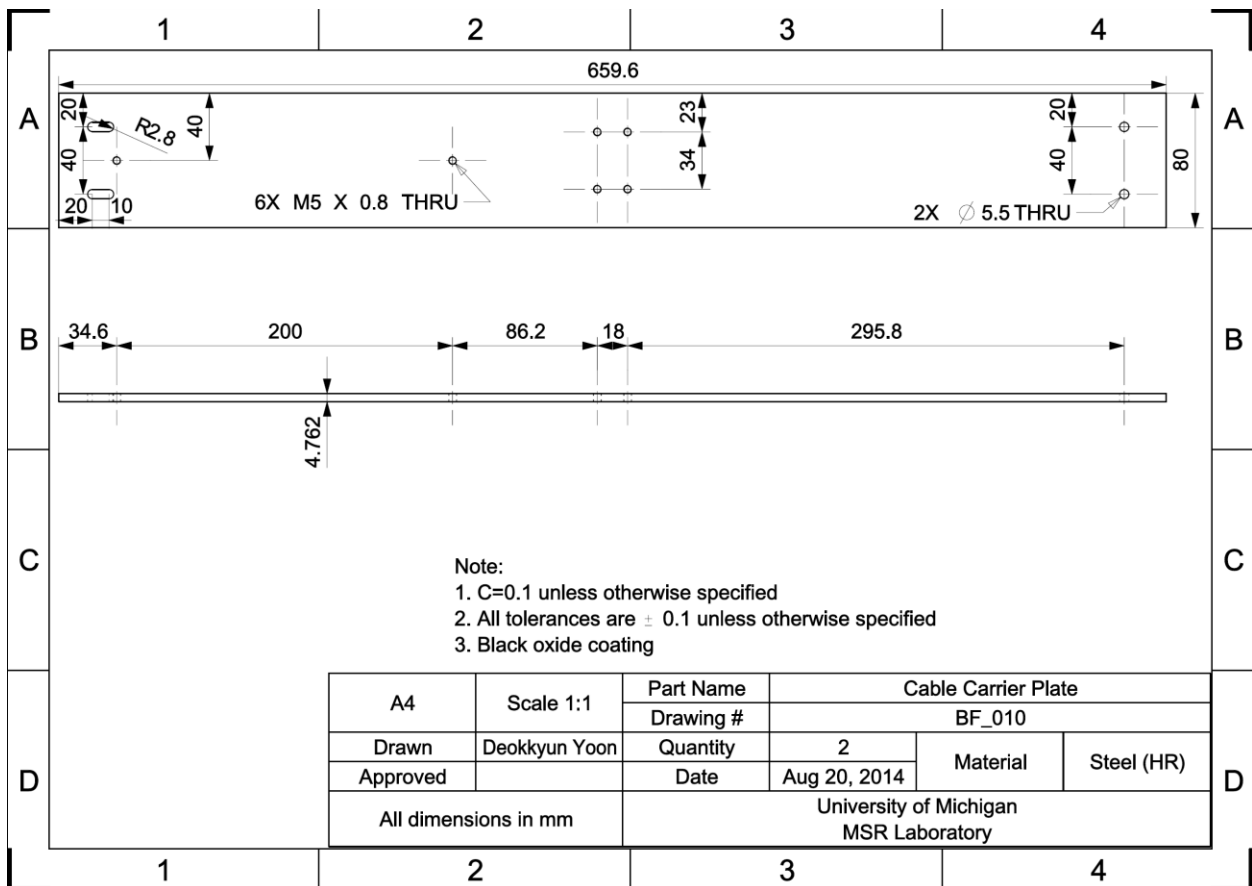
Manufacturing drawing of Cable Carrier Plate.
